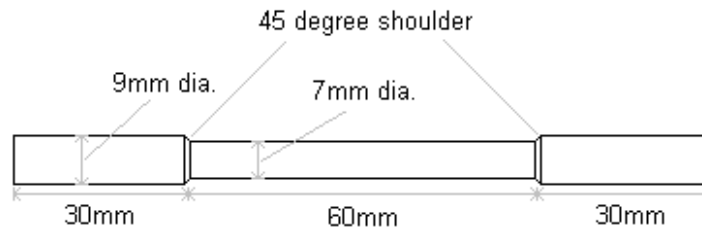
Dimensions of the rod-type tensile test specimens.
